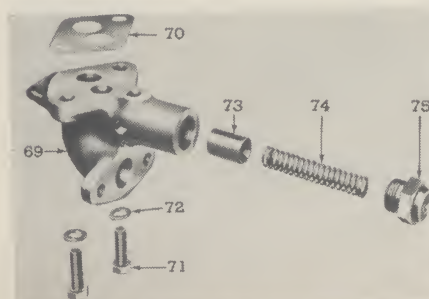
C—A GM engine non-adjustable type oil pressure regulator which is preset for 45 psi.
